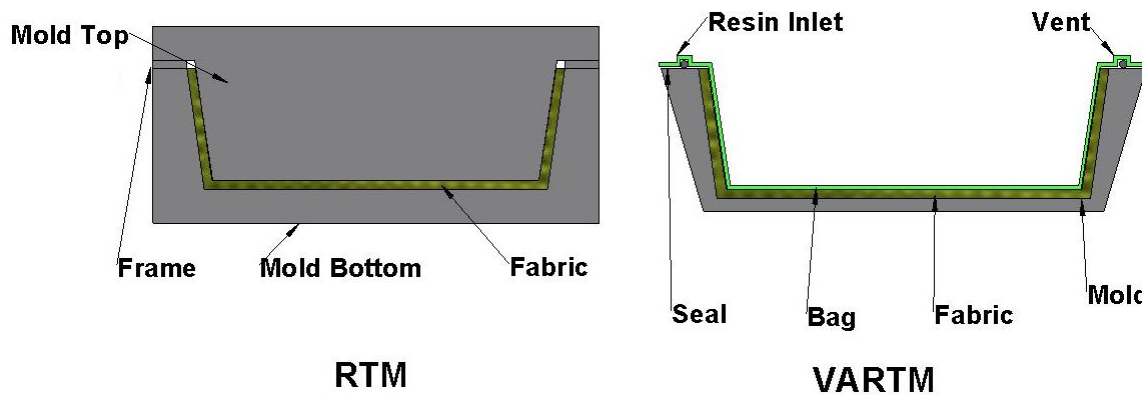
A schematic comparison of the typical RTM and VARTM process molds. Left: An RTM mold consisting of a thick and heavy mold top and bottom. Right: A VARTM mold composed of only a single sided lighter mold.
